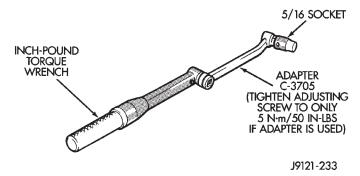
Using Band Adjustment Adapter Tool C-3705
